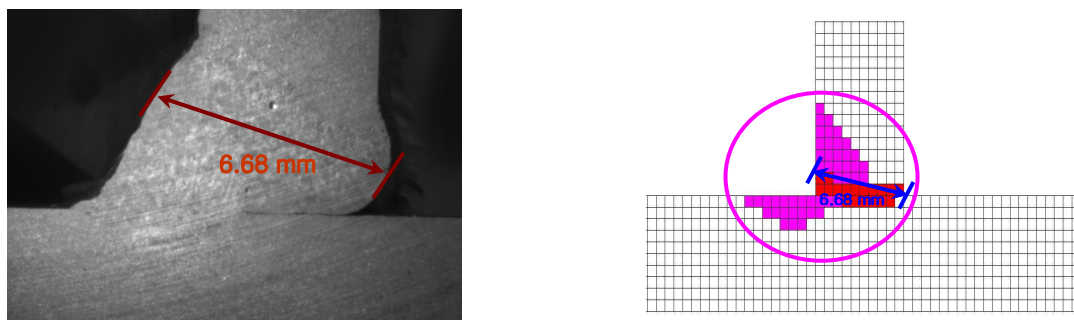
Schematic diagram of the optimization welding condition
